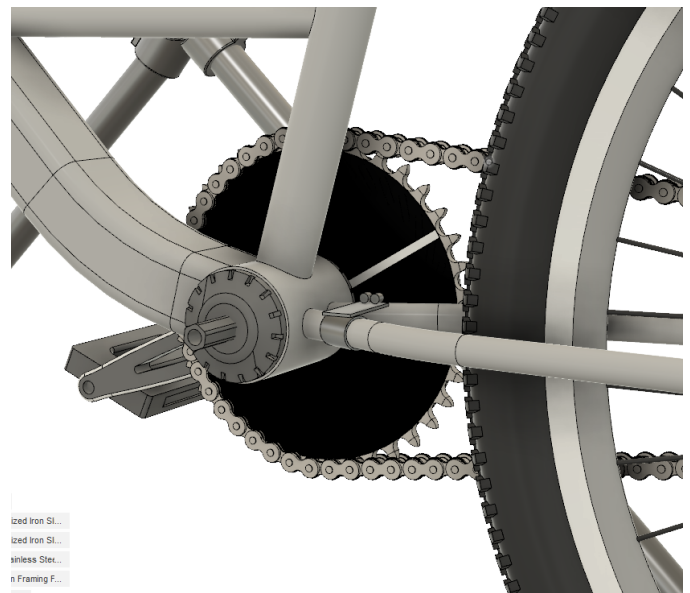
Prototype CAD Model of the Tachometer Mounting Setup
